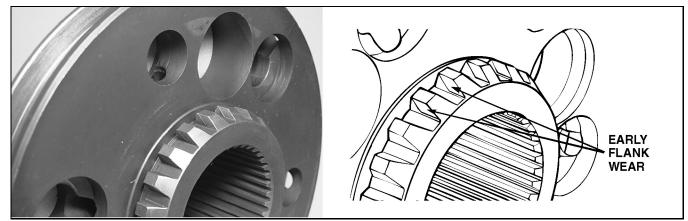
Synchronizer Hi-Lo Sliding Clutch
